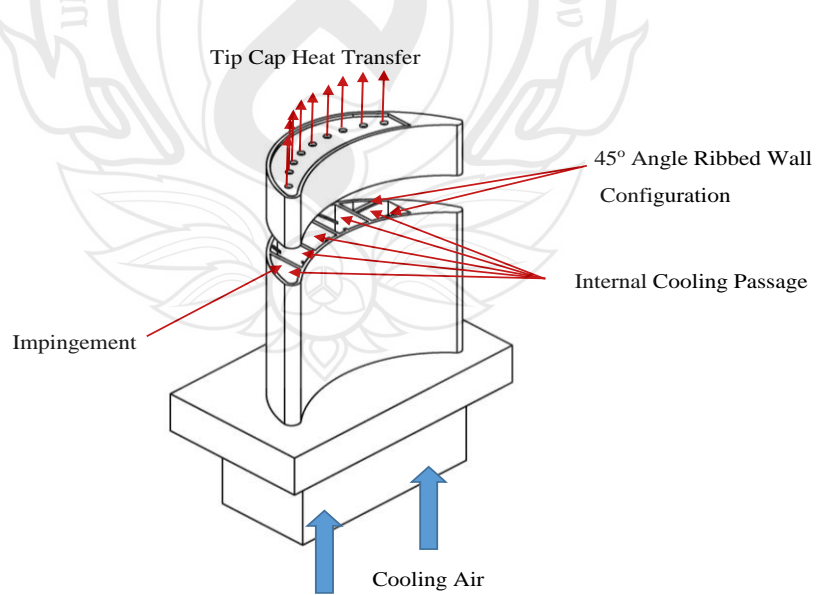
Three dimensional views with 45° angle ribbed wall configuration design of a cooling system in a gas turbine blade
